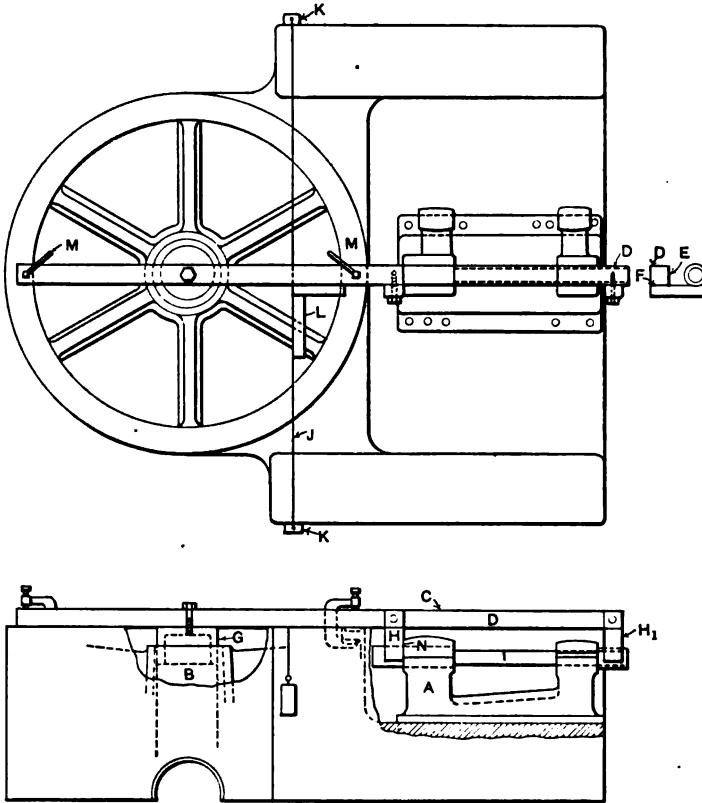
Gage for Aligning the Driving Shaft Bracket on a Vertical Boring Mill of the Bevel Gear Driven Type
